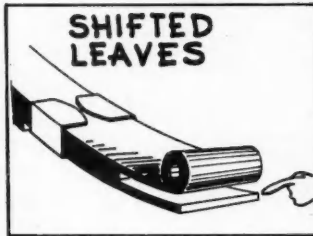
Leaves shift when center bolt breaks, reducing capacity.
